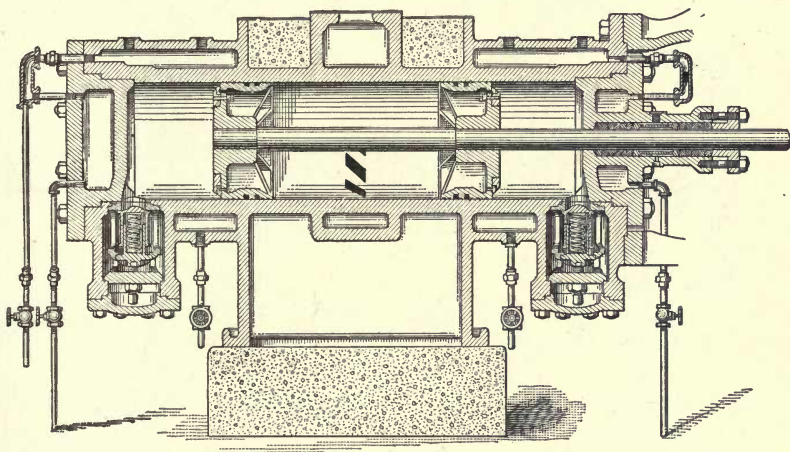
Section of Arctic Horizontal Double Single-acting Compressor.
